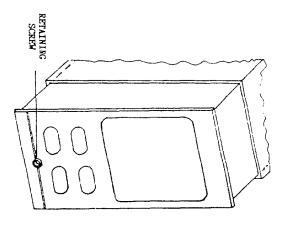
REMOVAL AND REPLACEMENT OF 3100 WITHIN HOUSING
